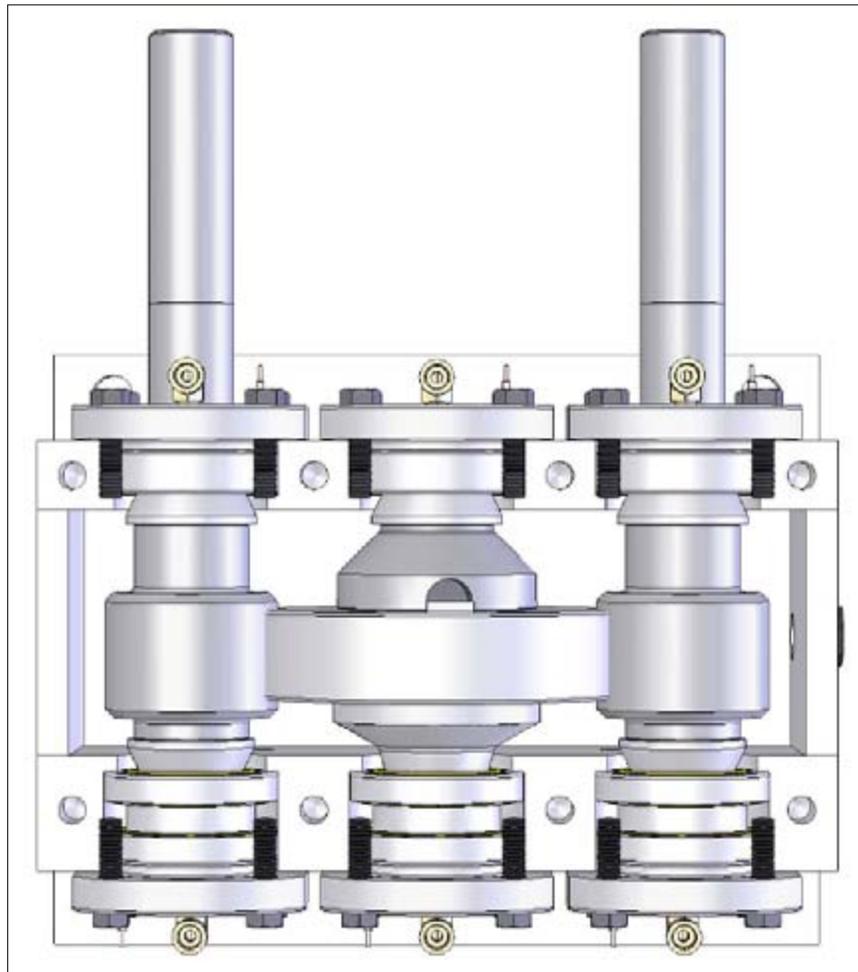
Preliminary layout of 3-Hole Test gearbox
